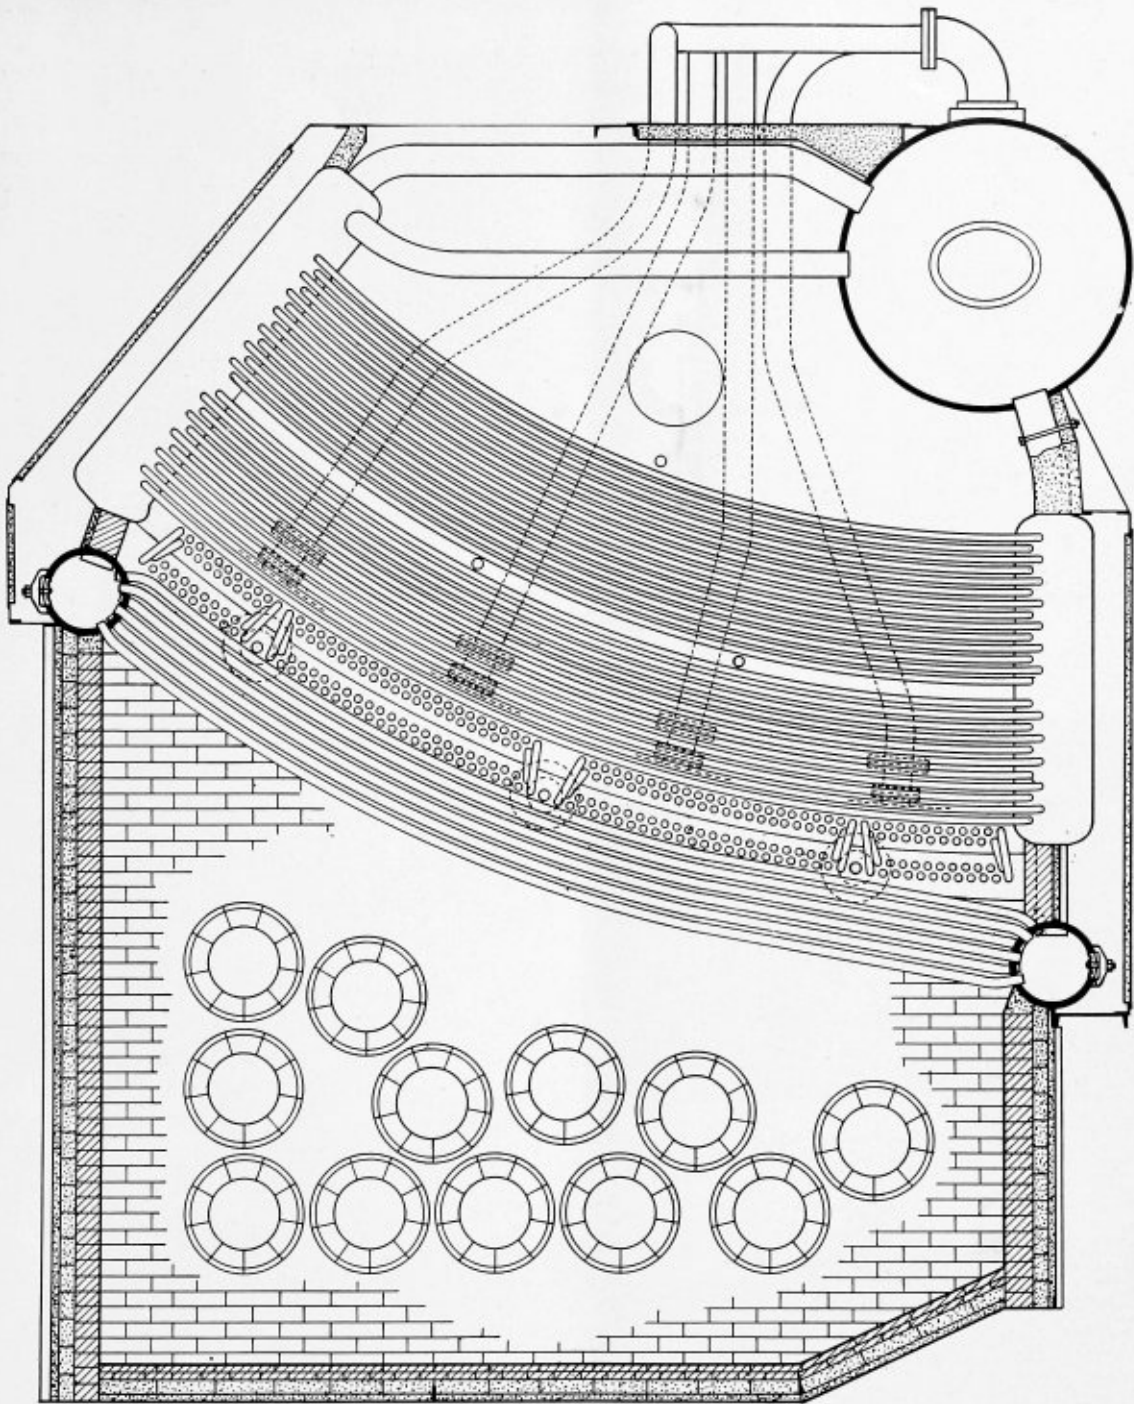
New Babcock & Wilcox boiler similar to type developed for the United States Navy to be installed in new scout cruisers
